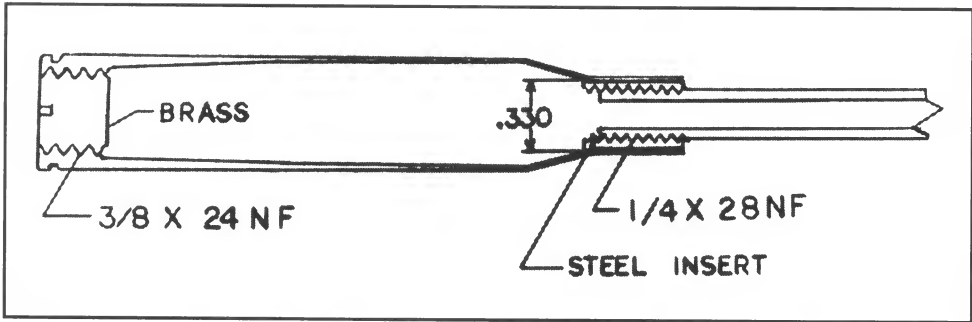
Cross-section drawing of the modified case for calibration showing the case-tube attachment. The left end of the steel insert is larger than the inside diameter of the chamber neck, which prevents the internal pressure from pushing the insert out of the case. The insert is also soldered to the case neck. The hole in the head of the case with the brass plug is required for assembly.
